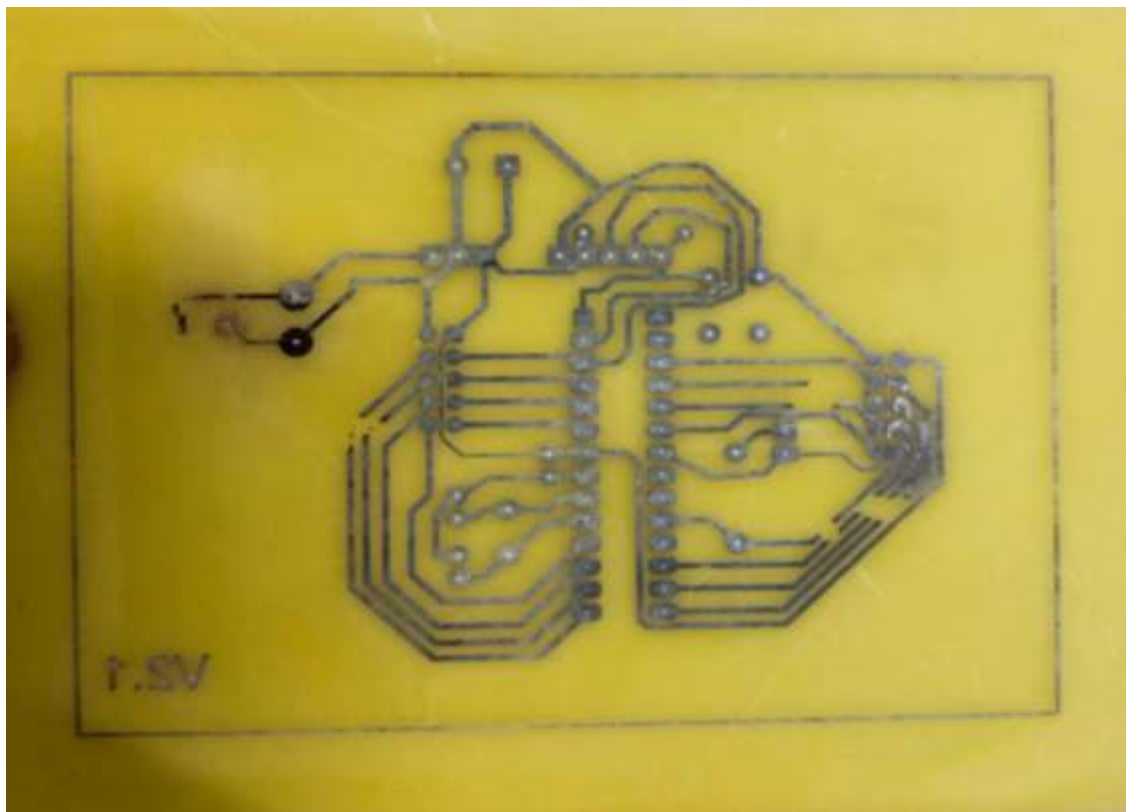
PCB of Motor controller Iteration 2 (Before mounting components)
